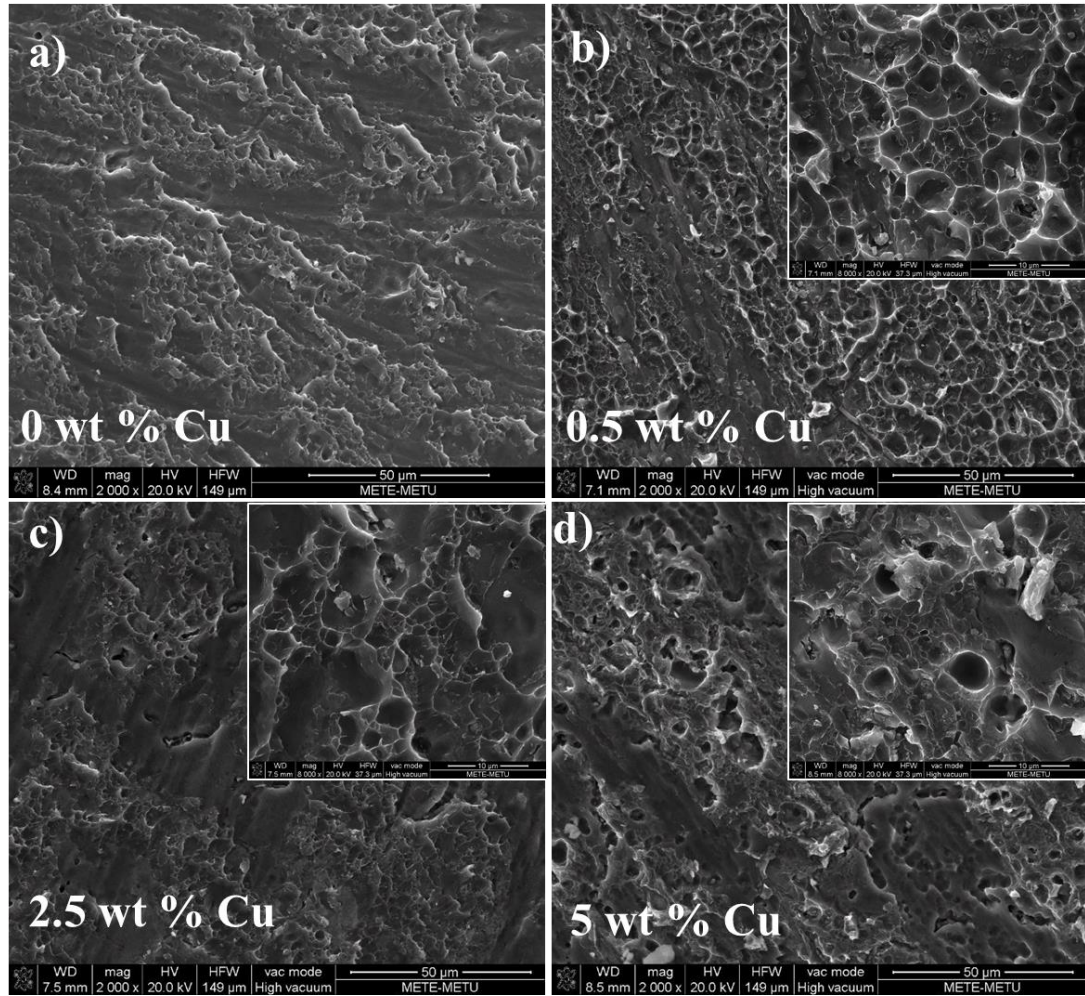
30. Fracture surface of the diffusion bonded joint of a) 0, b) 0.5, c) 2.5, d) 5 wt% Cu bearing Al-Mg-Si alloy.
